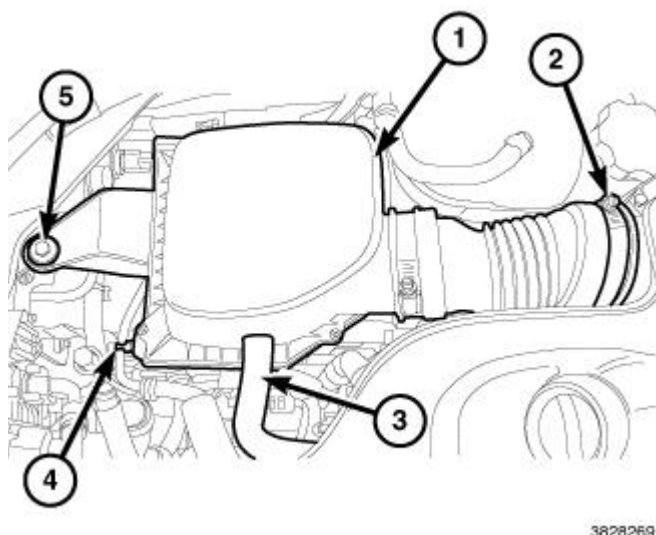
Air Cleaner Body, Clamp, Make Up Air Hose, Retainer & Bolt
